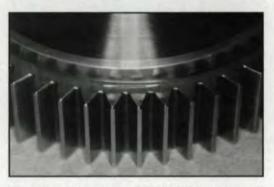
Spur gear end of 9310 multi-metal demonstration sun gear.
